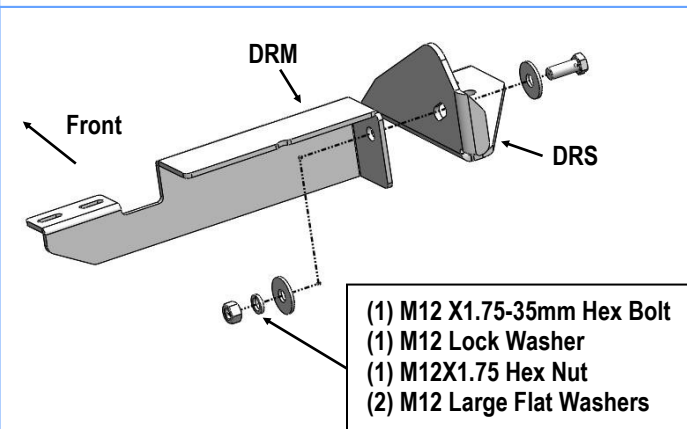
Exploded View of Driver Front Mounting Bracket Installation
